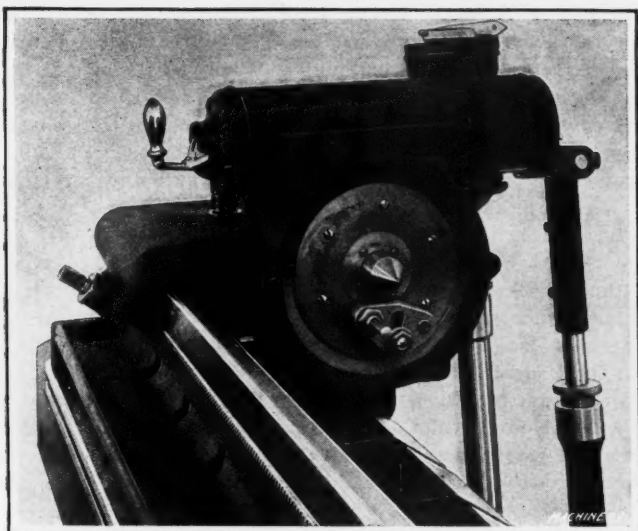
Headstock of Norton Cylindrical Grinding Machine
